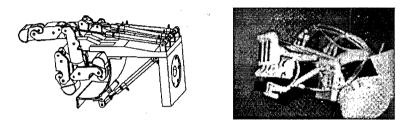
Prešov biomechanical gripper - version I scheme and photo
